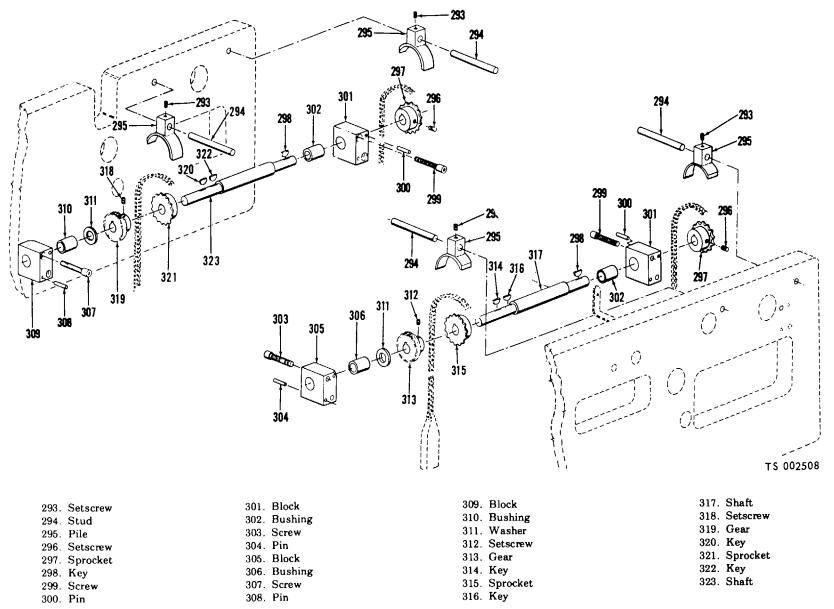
Slowdown sheeter alignment assembly (Sheet 5 of 7).
